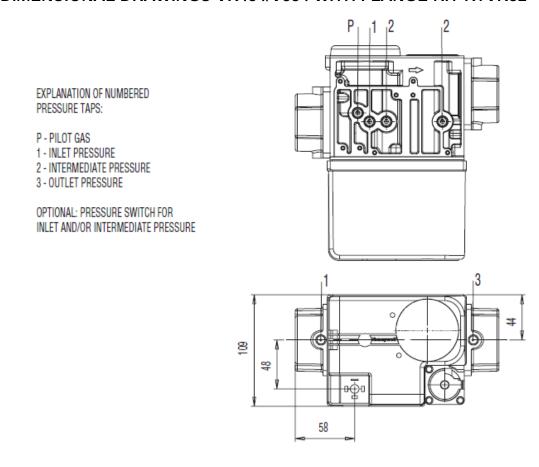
Dimensional drawing VR425/VR825 series (DN25) and VR432/VR832 series (DN32)
